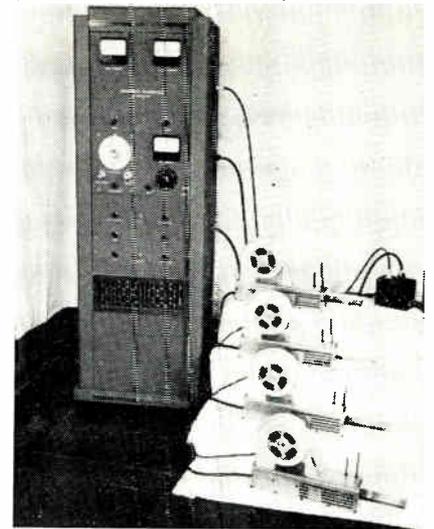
Four ultrasonic soldering heads for continuous strip coating operating on one 600 w generator.
